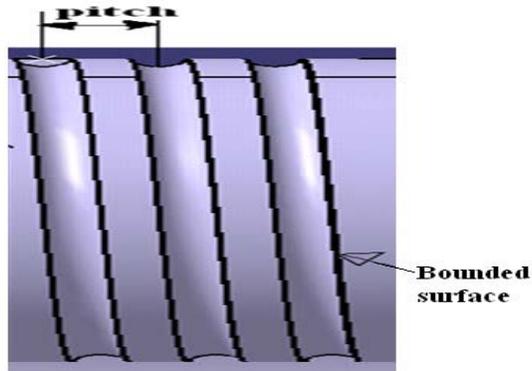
Showing pitch and bounded surface on knuckle thread
